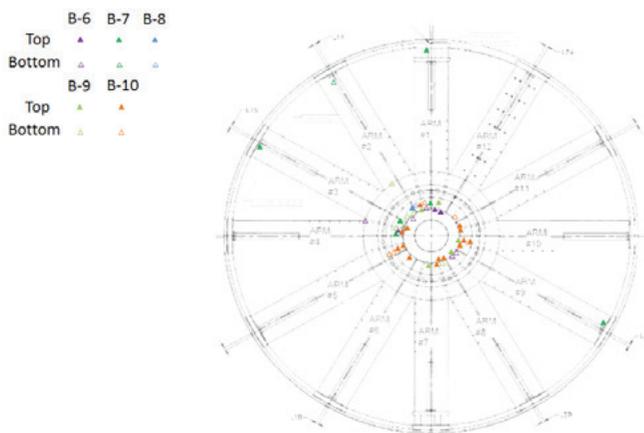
Example of rotor spider that was experiencing cracking in welds.
